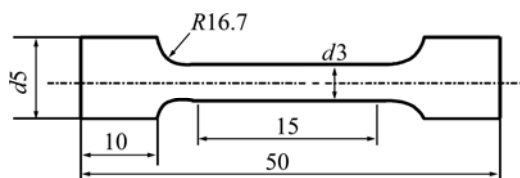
Dimensions of tensile specimens after secondary extrusion
